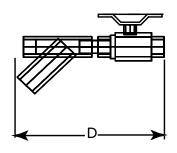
Three-way, 1/2 in. and 1-in. valve basic piping package
